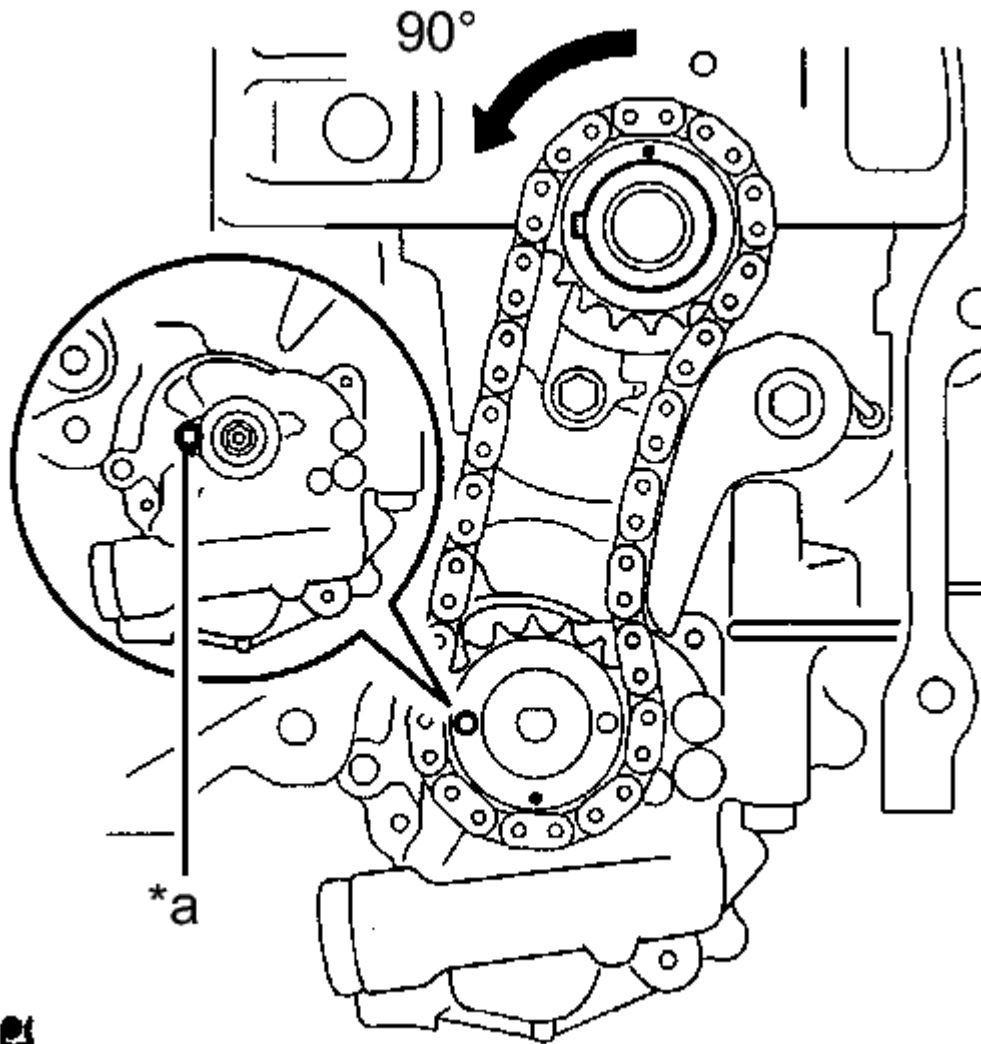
Aligning Oil Pump Drive Sprocket With Oil Pump
